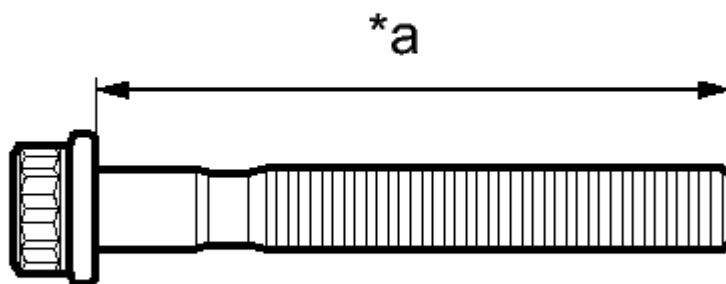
Identifying Crankshaft Bearing Cap Set Bolt Measurement Length
